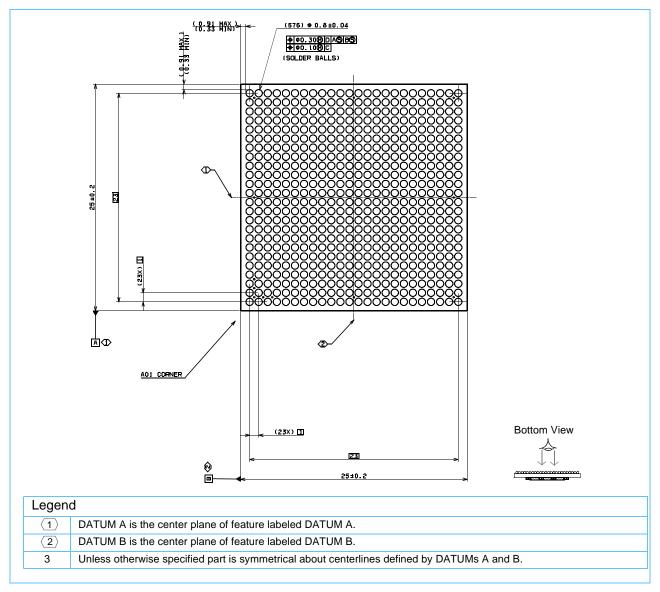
PPC 970FX Microprocessor Bottom Surface Nomenclature of Mechanical Package, Leaded, CBGA Package
